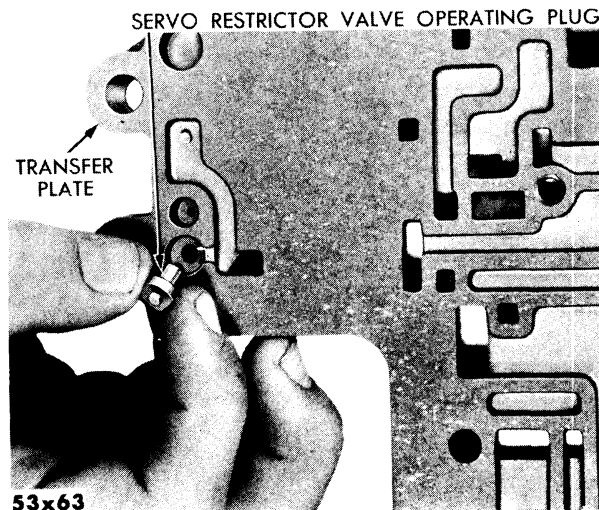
Installation of Servo Restrictor Valve Operating Plug
